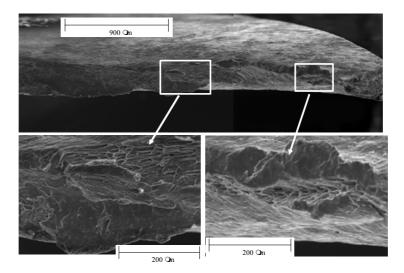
Scanning electron microscope images of the failure of the conical parts. Insets show ductile and shear fracture (bottom right) and shear fracture and void sheeting (bottom left)
